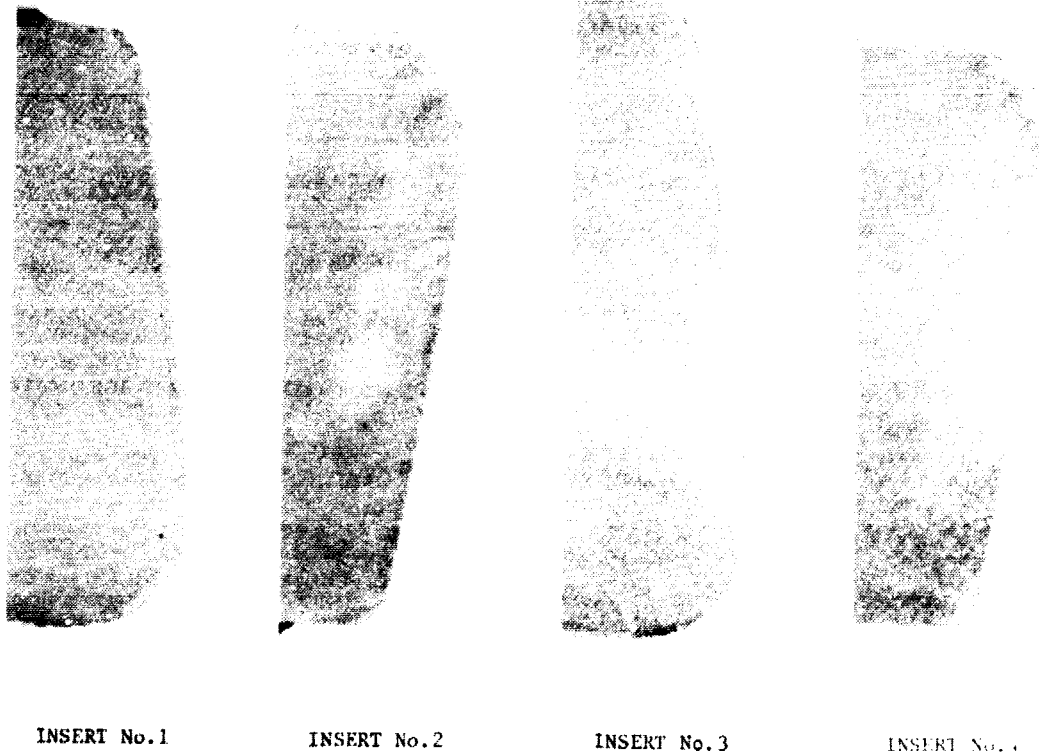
Insert cutting edges of T-rib cutter used to machine all delivered panels.
